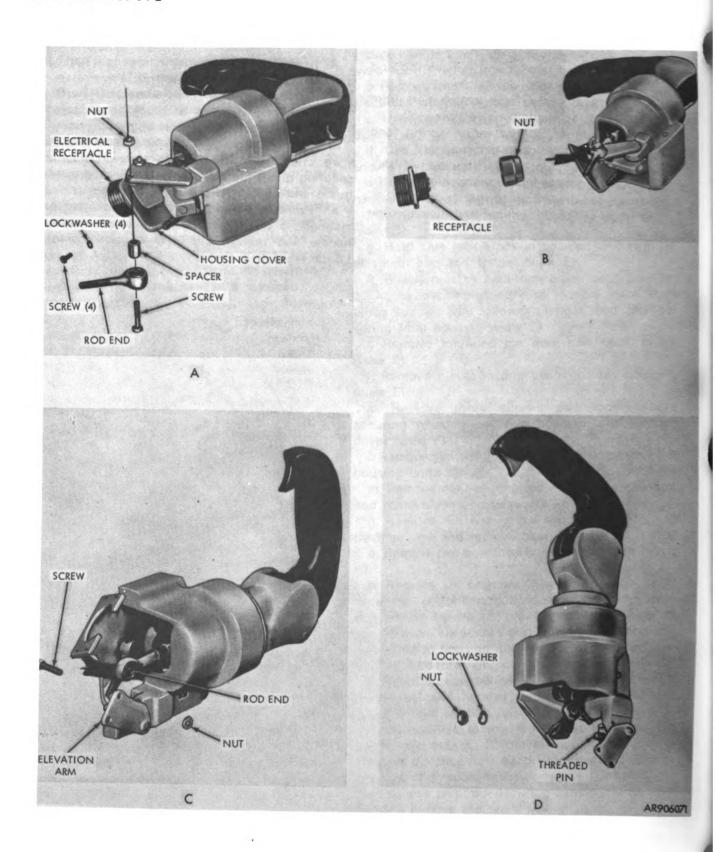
Commander's control disassembly or assembly (1 of 4).
